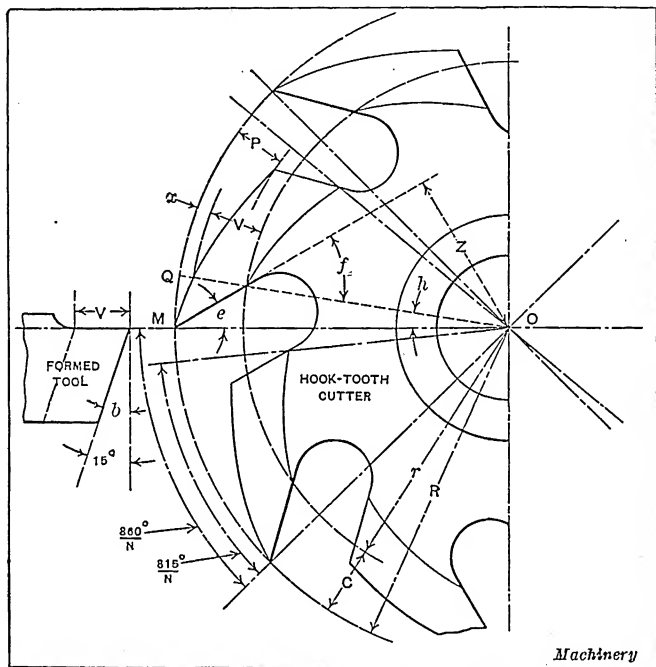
Hook-tooth Cutter and Values used in determining Angle at which Shaper Forming Tool is set
